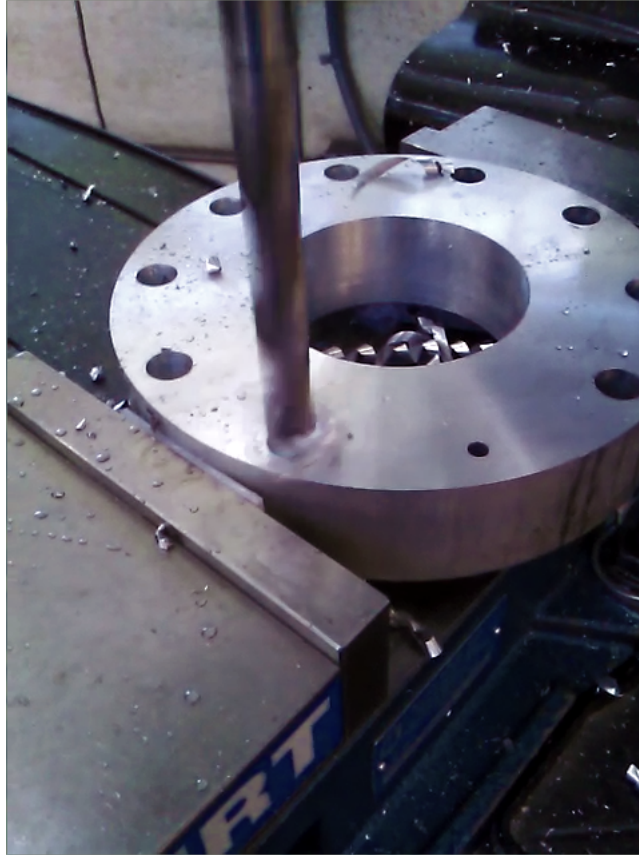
Machining of the vessel cap. A Trakk 2-axis mill was used; the Z-axis was controlled manually.
